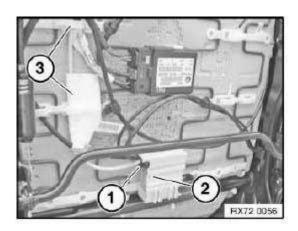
Identifying Cable Tie And Plug Courtesy of BMW OF NORTH AMERICA, INC.
